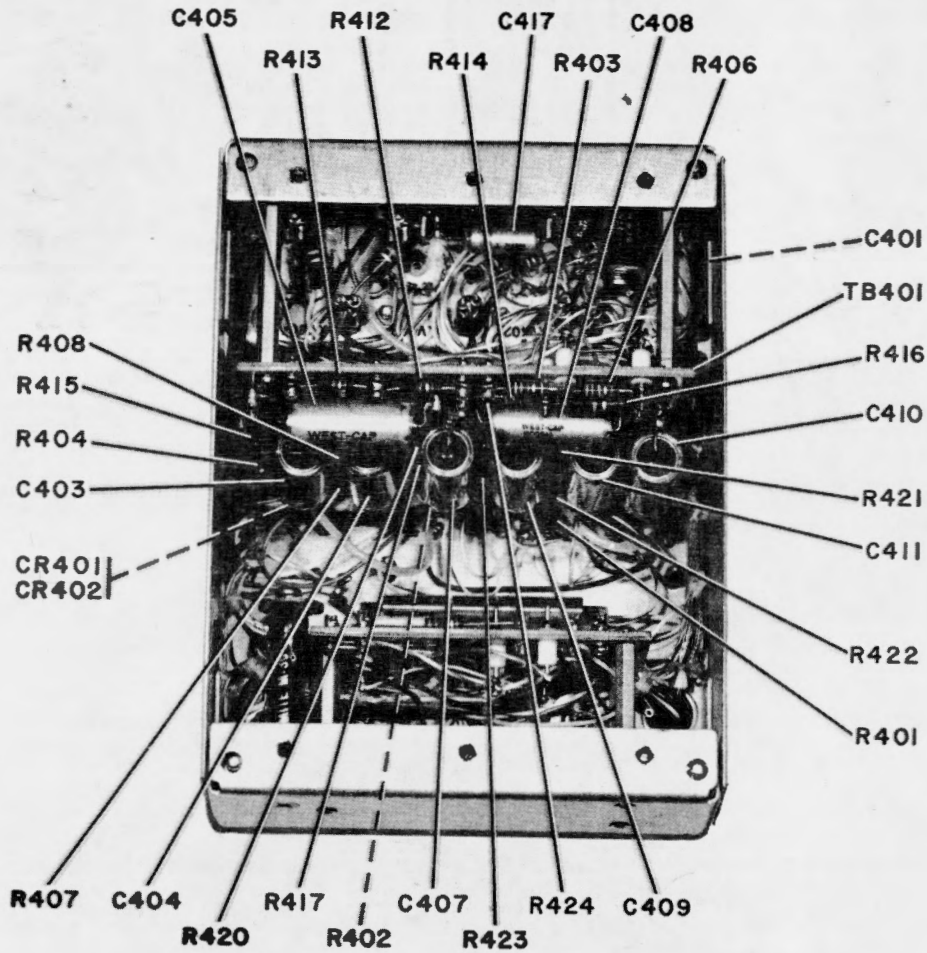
AM-1565/URC, Servo Amplifier Subassembly, Bottom View (B)
